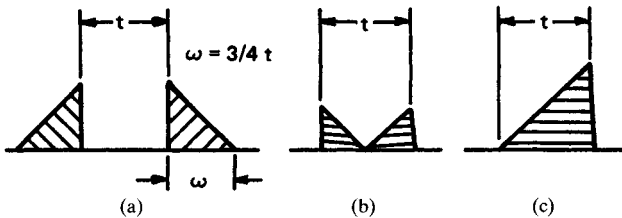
Comparison of fillet welds and groove welds. (*The Lincoln Electric Company.*)
